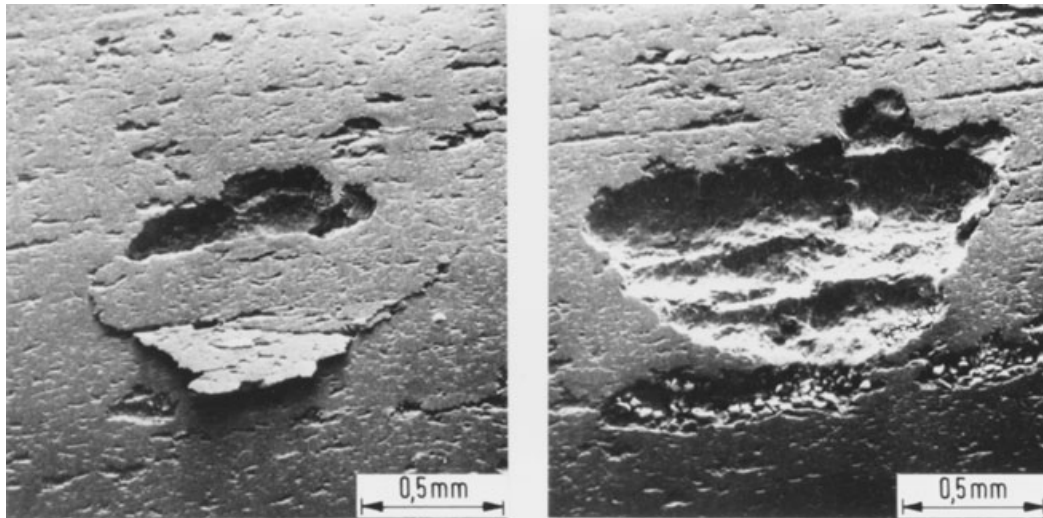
Progressing pit mark on a tooth flank that is caused by surface fatigue [VDI 3822, Blatt 5]
